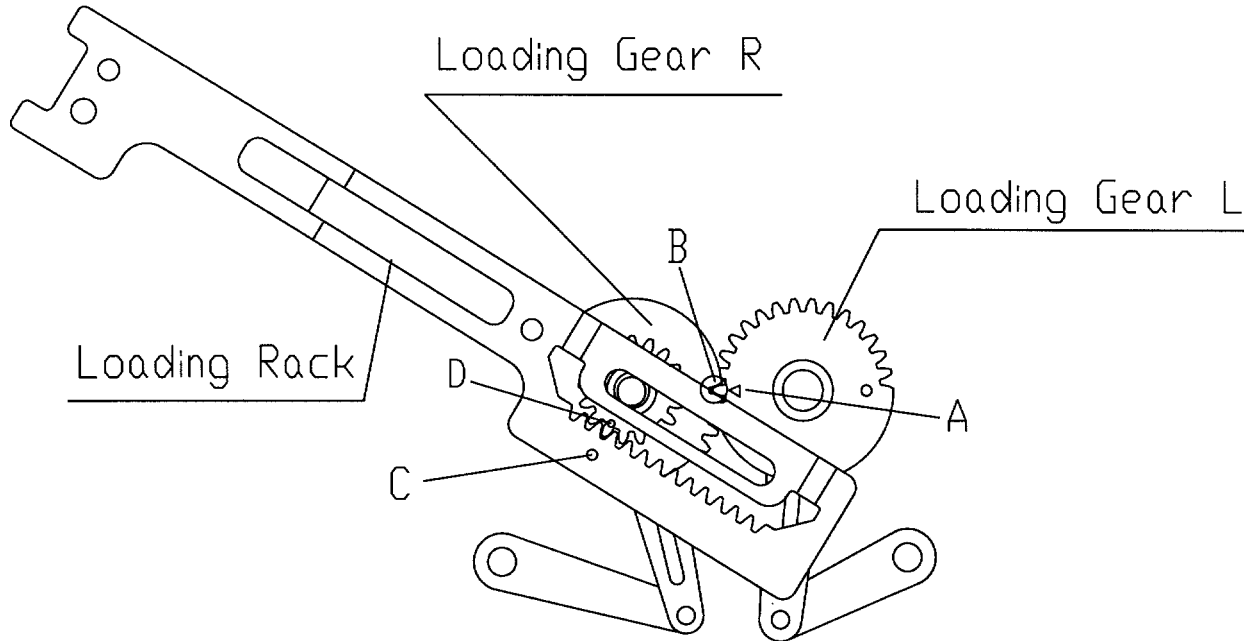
Mechanical Checks/Loading Rack and Loading Gear Alignment
